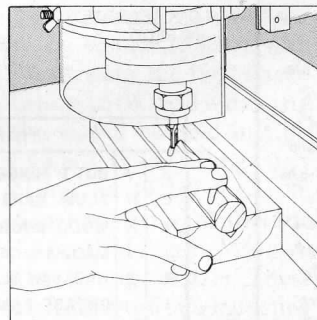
Routing spiral groove in delivery shaft. Use entire 36" dowel rod for safety.
